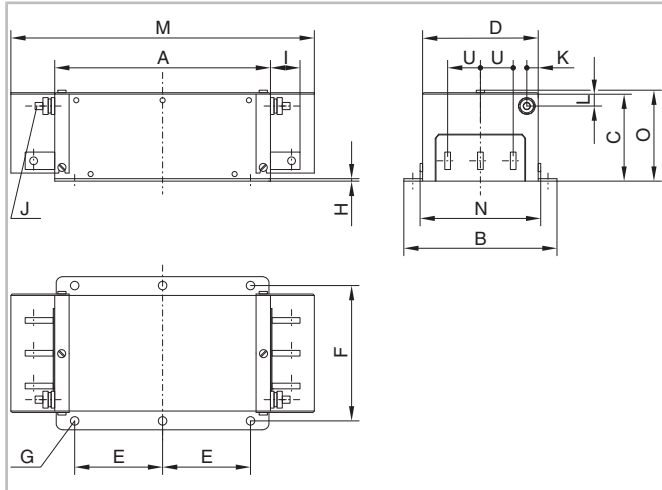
Dimensional drawing of RFI filters 3259-320-99 .. 3259-600-99
